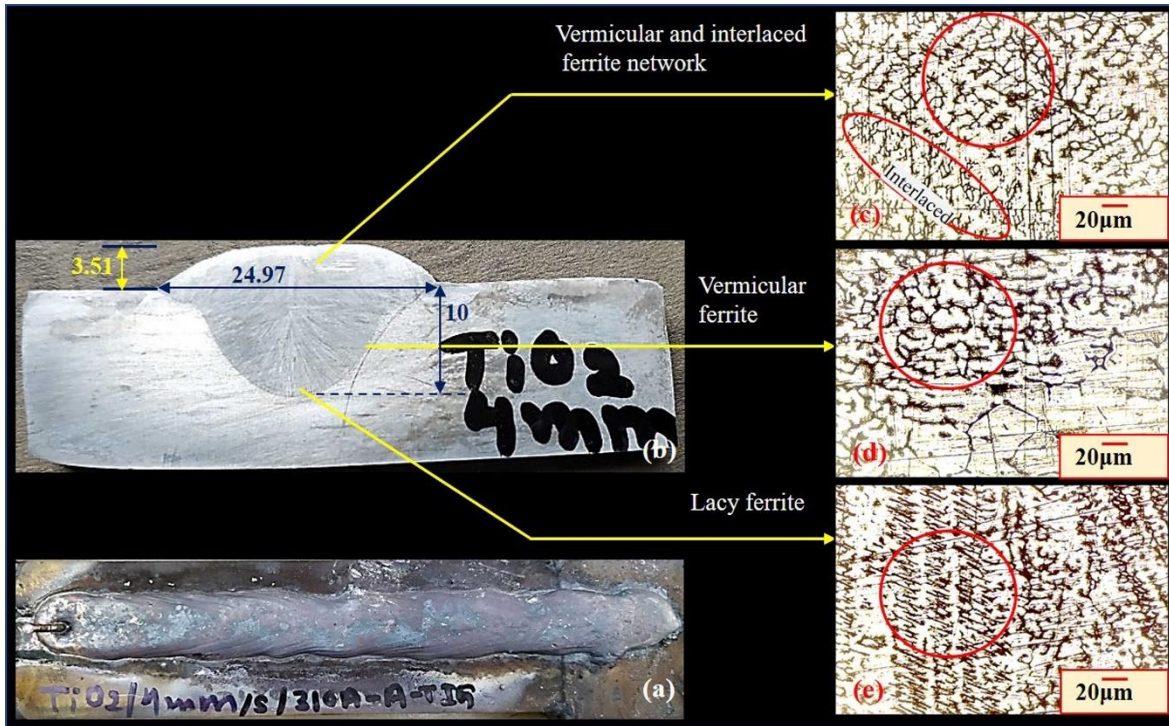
Photograph contains (a) Hybrid welded coupon using TiO₂ flux at 4 mm/s welding speed (b) Macrograph of the etched specimen (c), (d), and (e) showing the microstructure of different regions of weld bead
